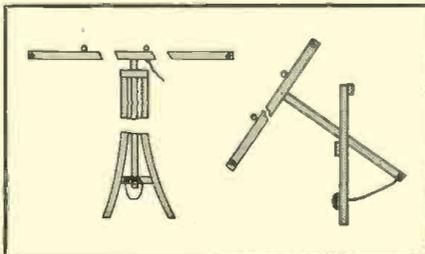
Details of the temporary support which is used to facilitate the tuning.
